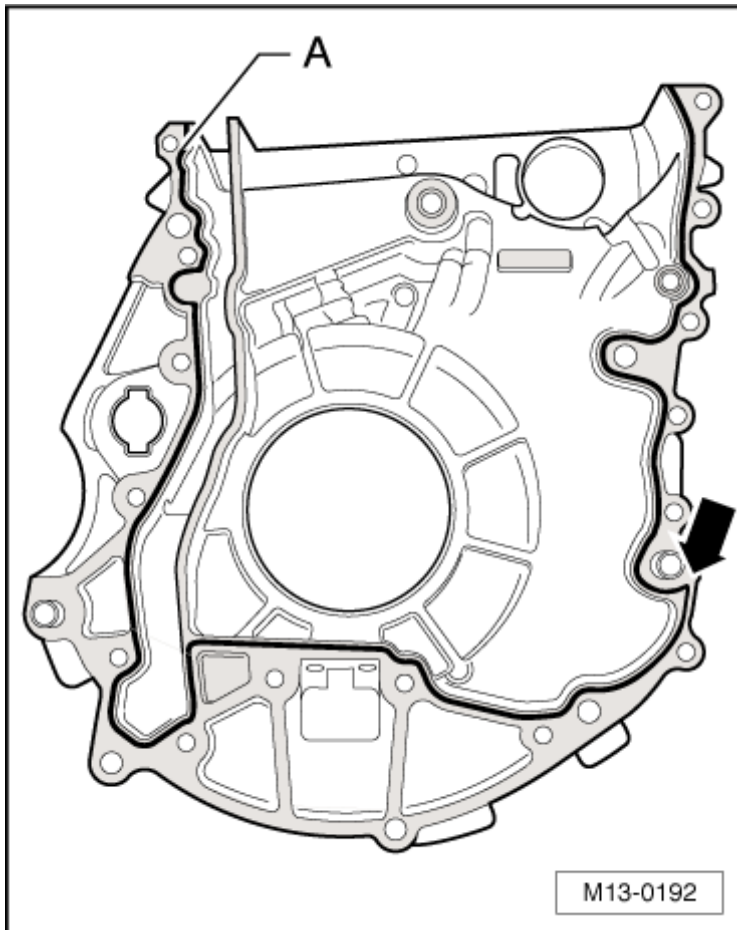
Applying Sealant Bead On To Control Housing Cover
